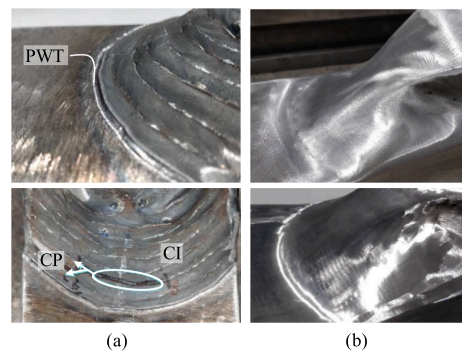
(a) Fatigue CI and CP at a HFMI-treated joint at the inter-bead toe of a multi-pass weldment, and (b) corresponding ground joint with longitudinal finishing.
